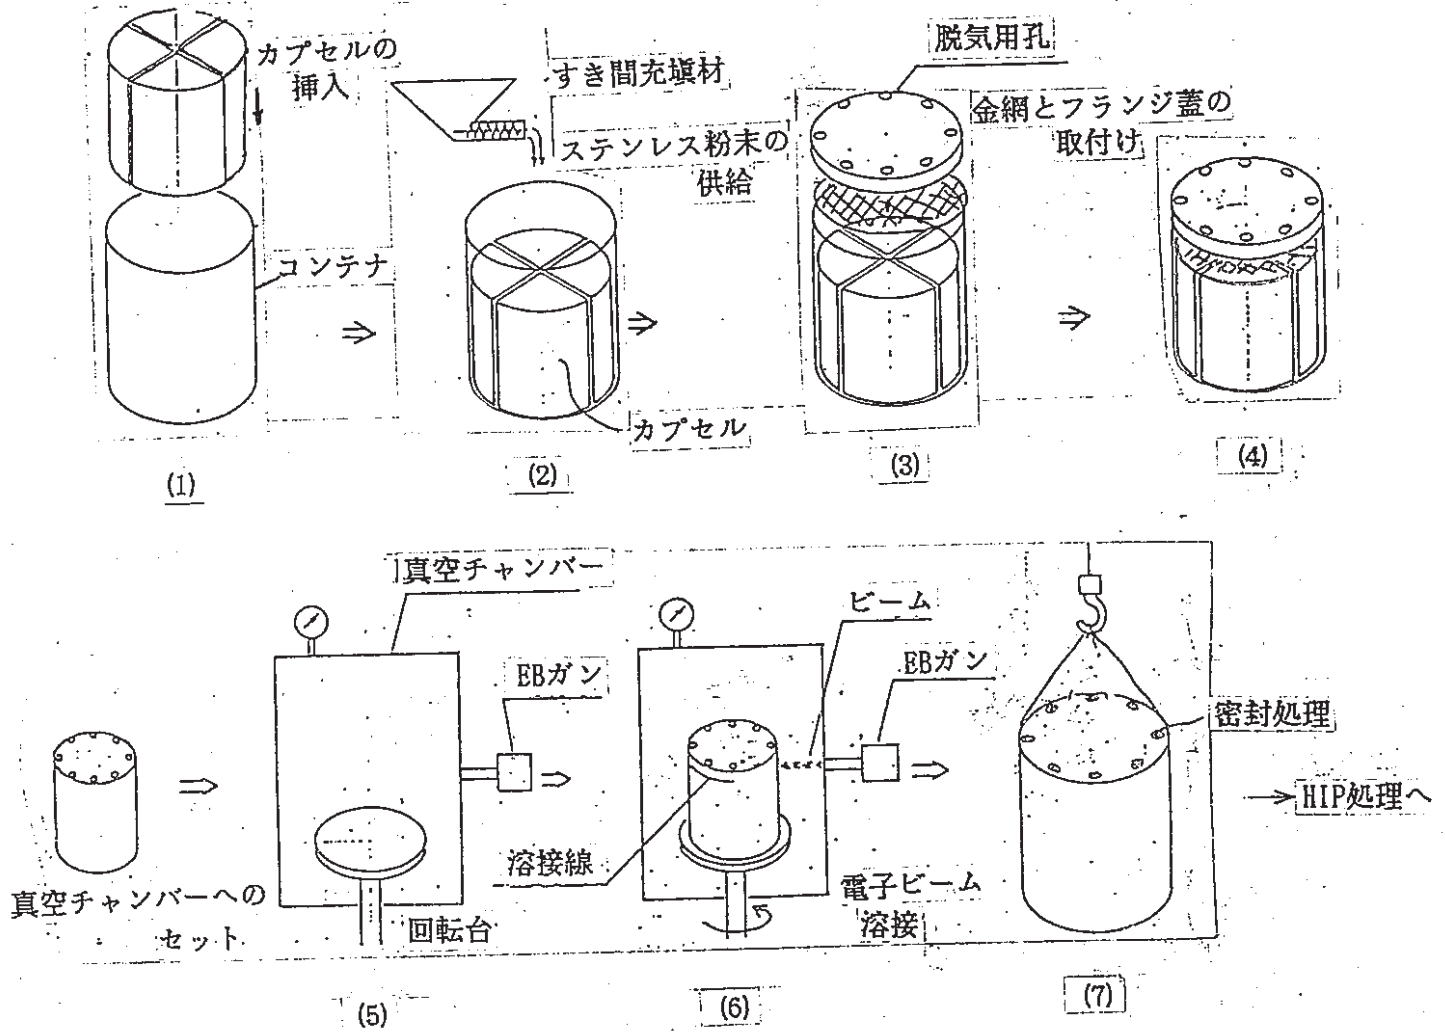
Electron beam welding method of HIP container and flange cover
